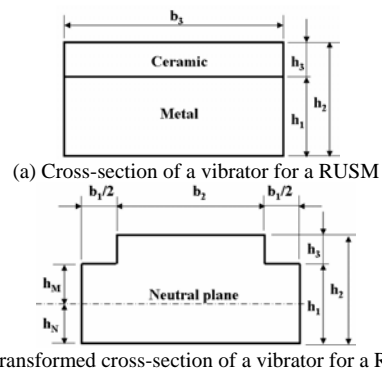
Cross-section and transformed cross-section of a vibrator for a RUSM.
